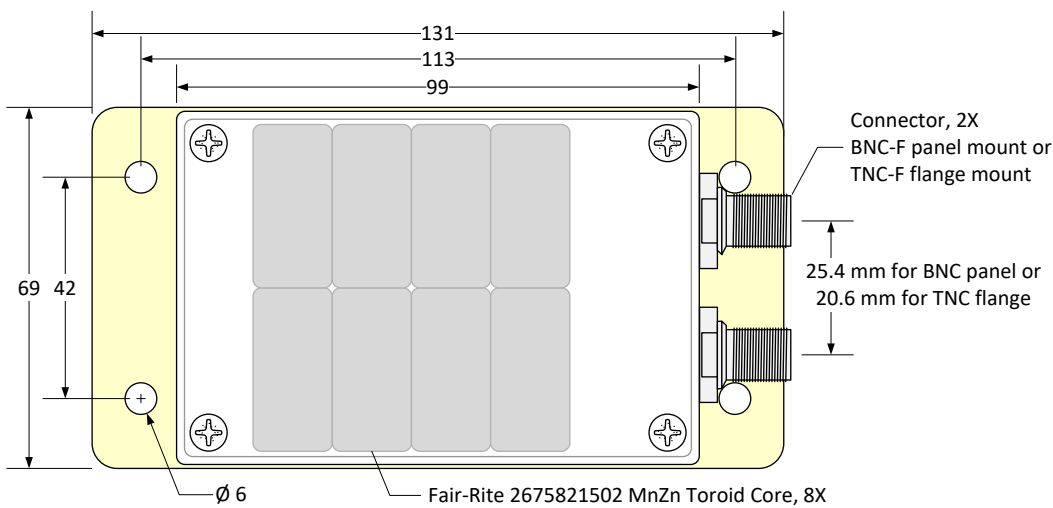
~ 75% scale drawing showing basic enclosure dimensions (mm) as measured. The binocular core is not centered. Both connectors were placed at one end to ensure enough space for internally connecting the coax to the connectors and to allow the enclosure to shield the connections from rain. ©2020 W. Reeve
